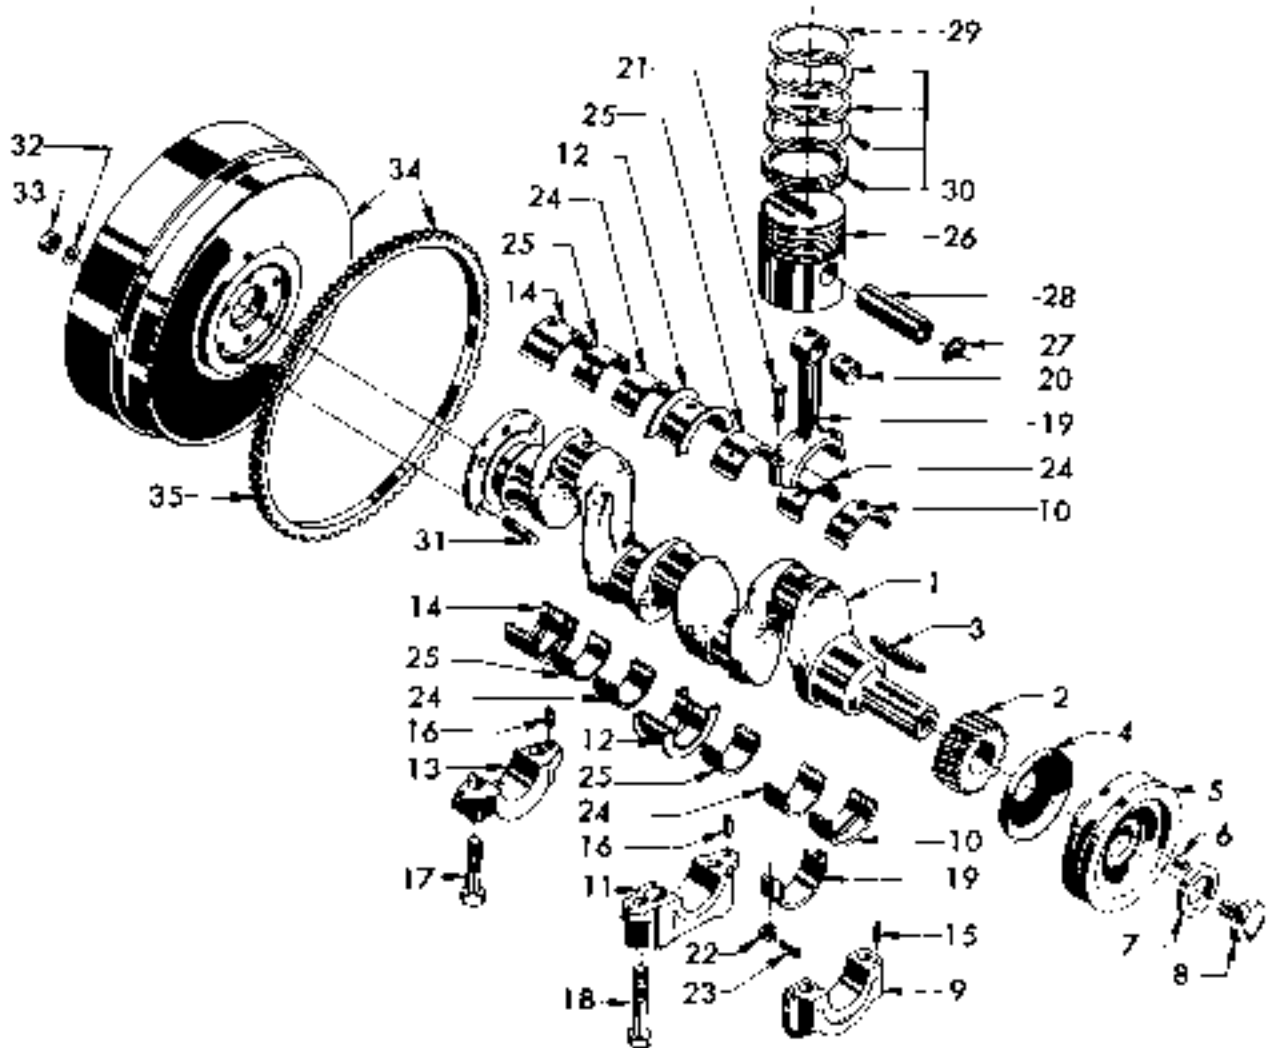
A - CRANKSHAFT, FLYWHEEL, CONN. RODS AND PISTONS
